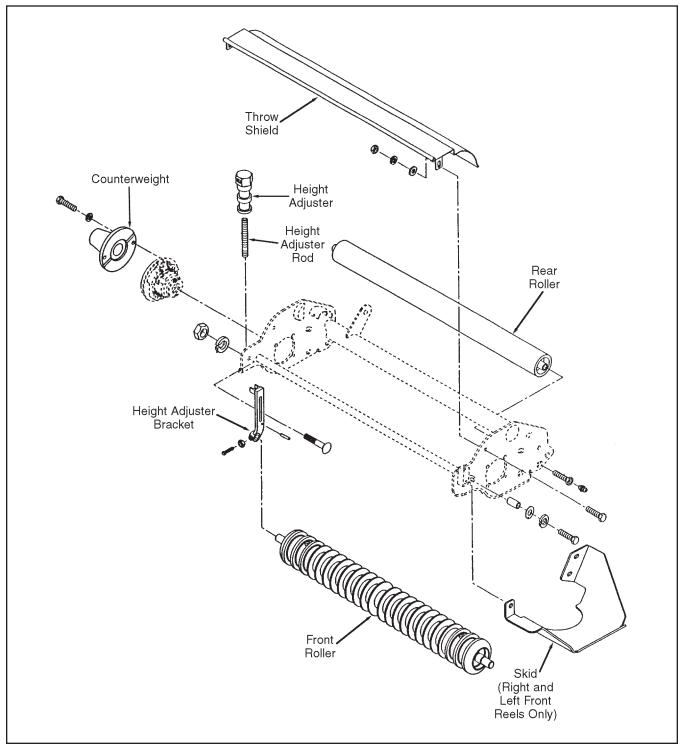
F-3. Mower Unit Repair (Sheet 1 of 2)
